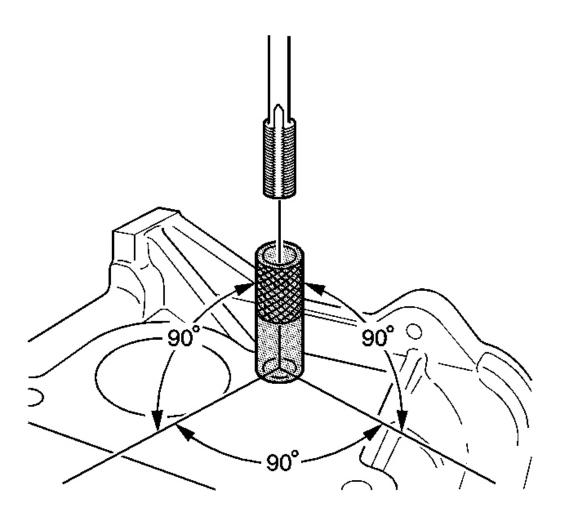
View Of Tapping Guide Courtesy of GENERAL MOTORS CORP.
